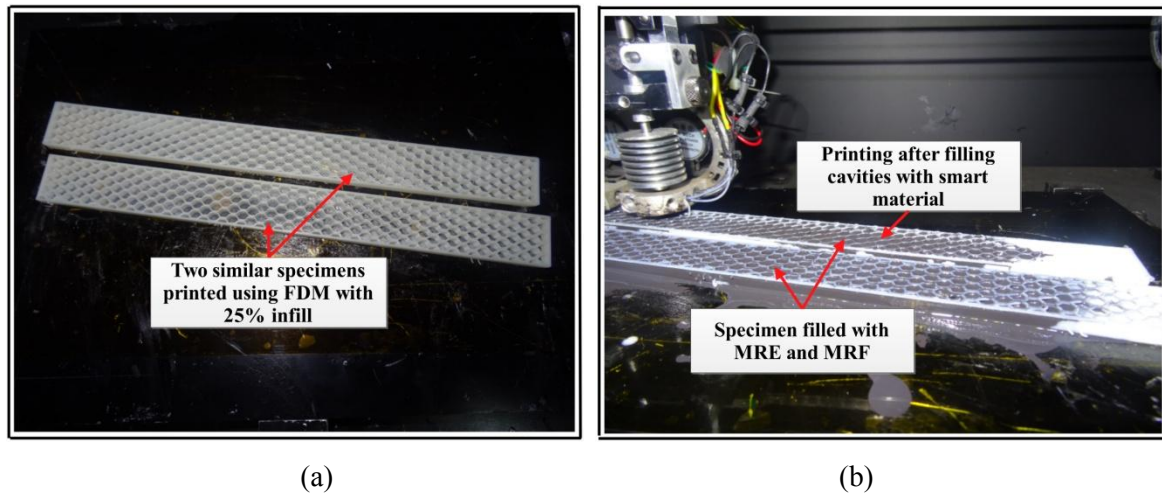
(a) Beam printed using fused deposition technique (b) Beam embedded with smart material i.e. MRE & MRF
